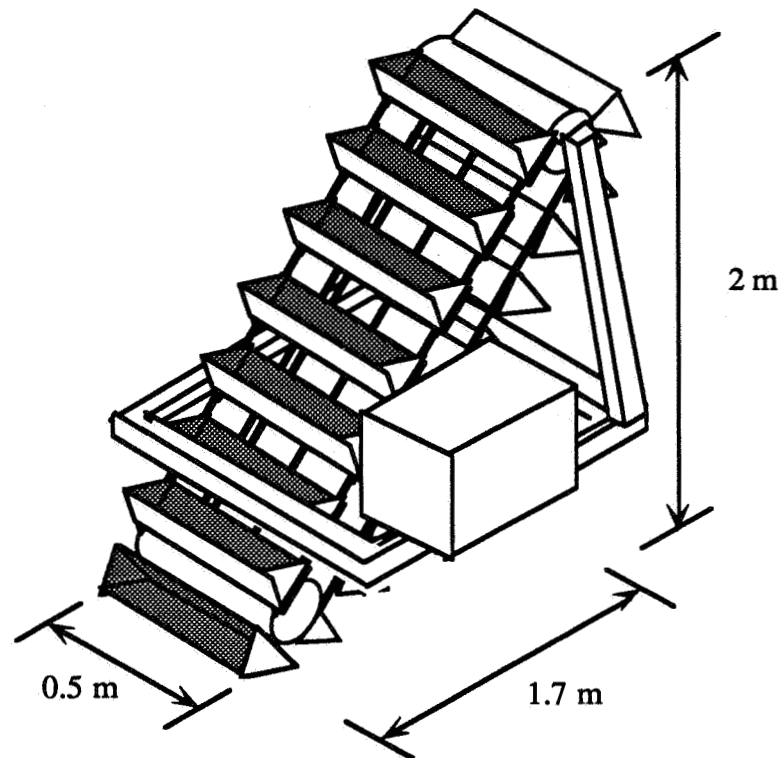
DIMENSIONS OF BUCKET CONVEYOR
